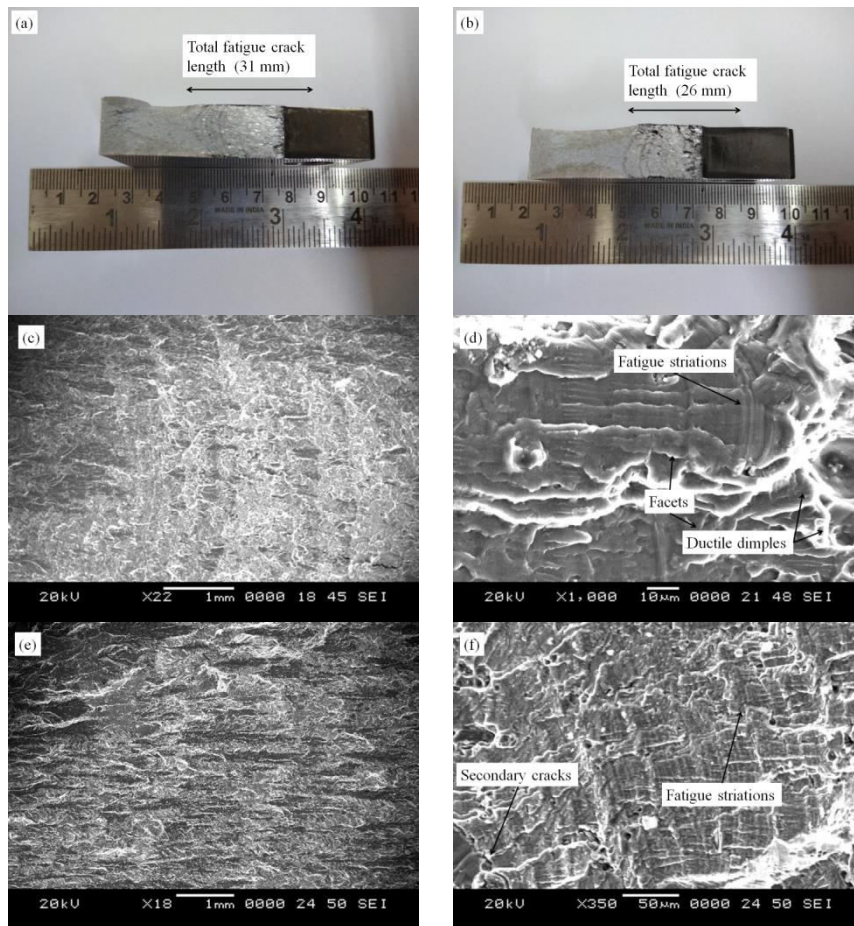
Fatigue fracture surfaces of the alloy under FALSTAFF loading; (a,c,e) RRA, (b,d,f) T6
